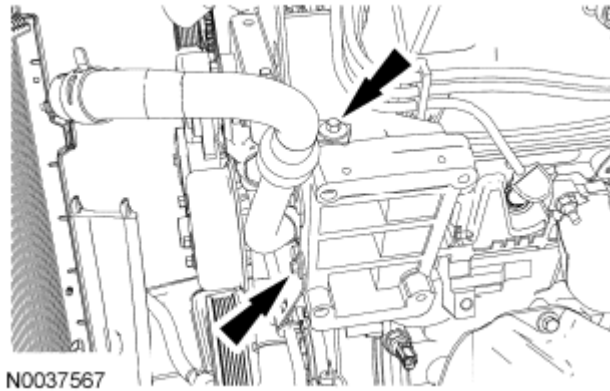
Locating Power Steering Reservoir-To-Power Steering Pump Supply Hose Bracket Bolts
